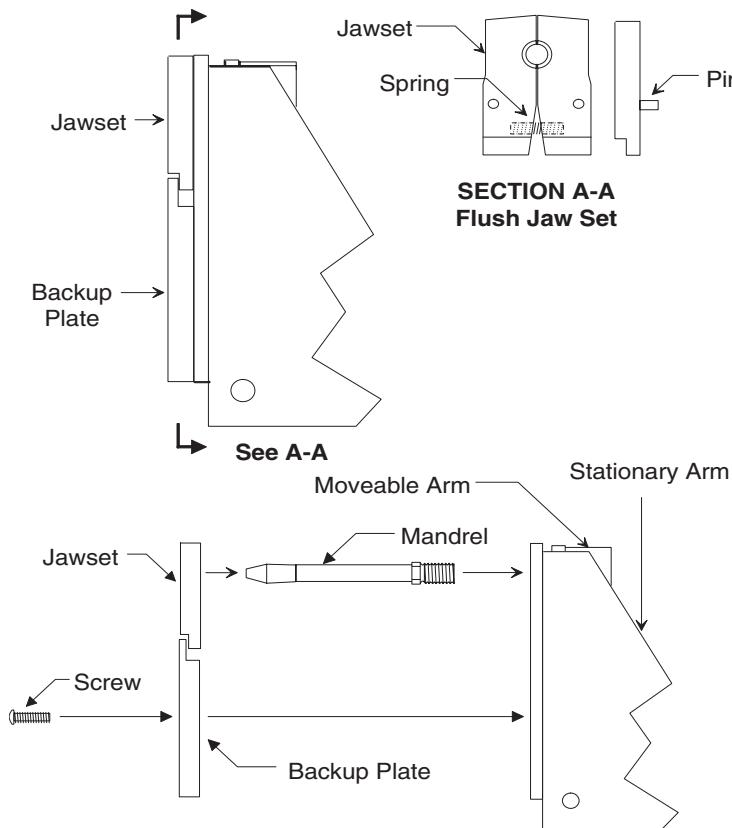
Offset Adapter Jawset (guard not shown)
